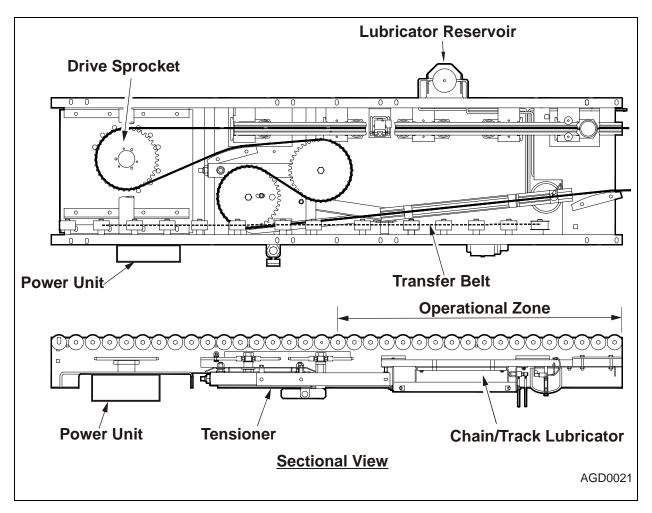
1 Accuglide Drive Section - Direct (Left-Hand Assembly Shown)
